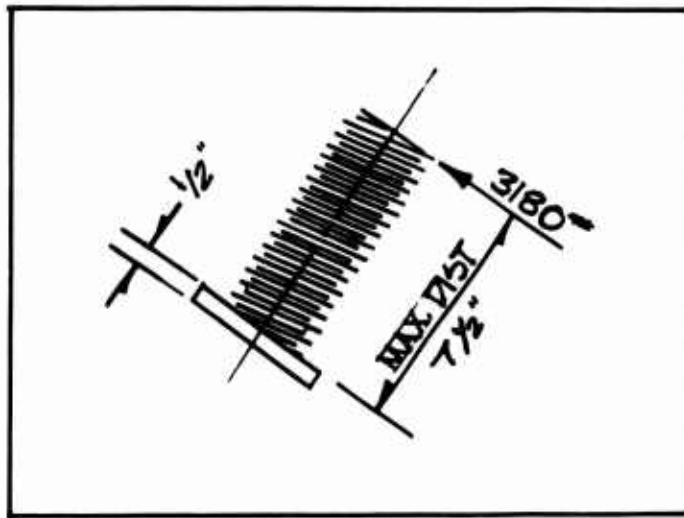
Maximum Bending Stress on Main Adjustment Screw of Base Pad
